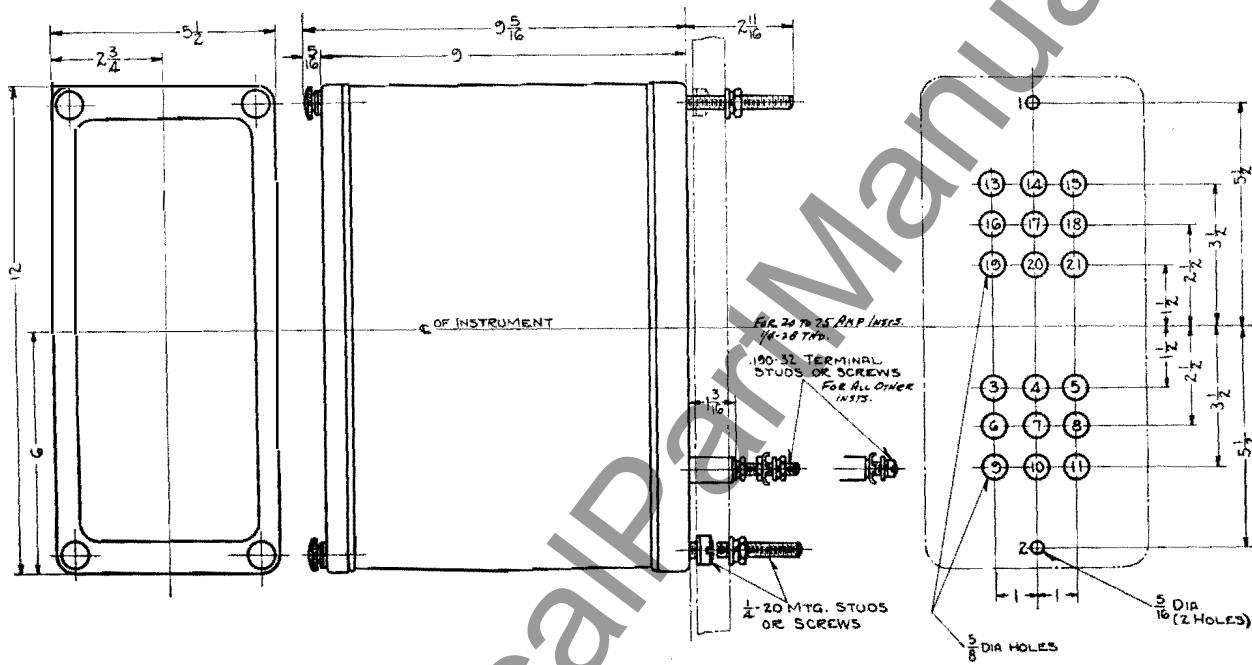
OUTLINE AND DRILLING PLAN, TYPE G-40 RECORDERS
